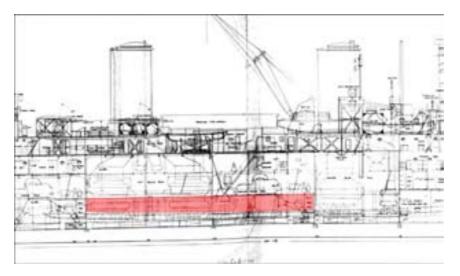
Sketch showing the extent of imploded or collapsed shell plating
